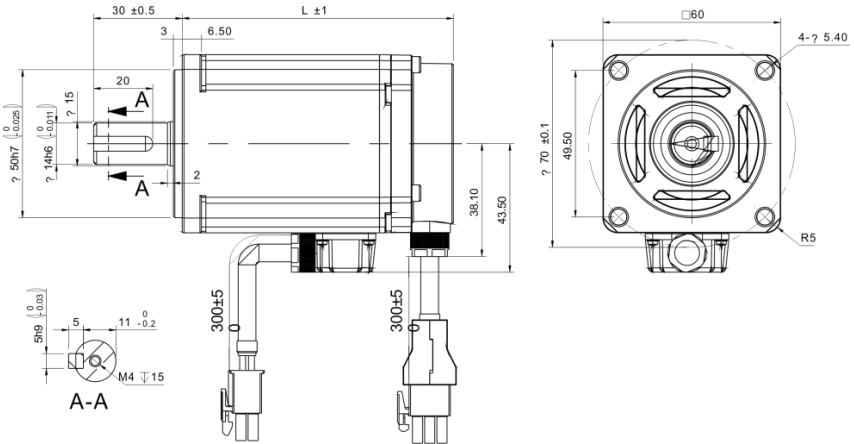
Installation dimension drawing of 60 flange servo motor
